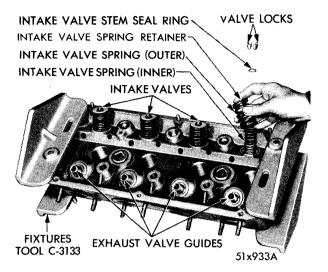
Installing Inner and Outer Intake Valve Springs and Retainers
